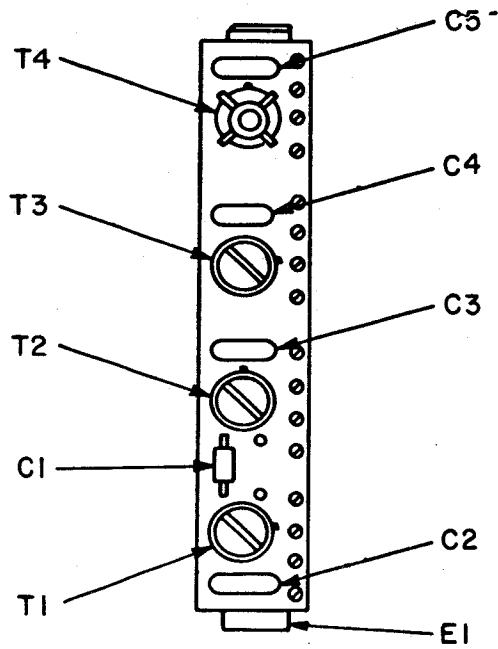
16 MHz Subassembly A2A4A6, Component Locations
